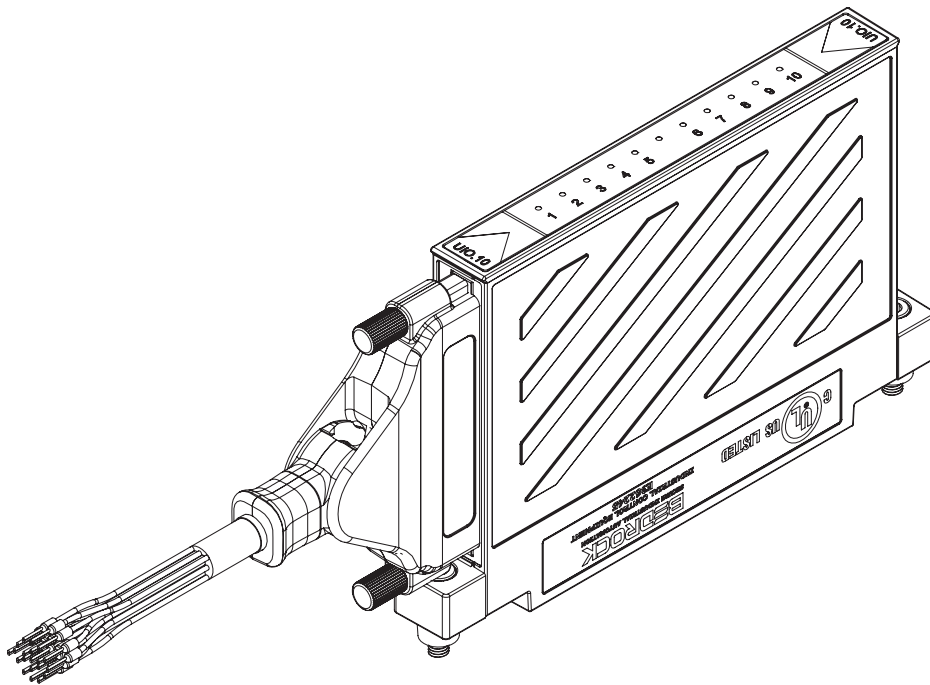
Bedrock Universal Cable Connected to SIO Module
